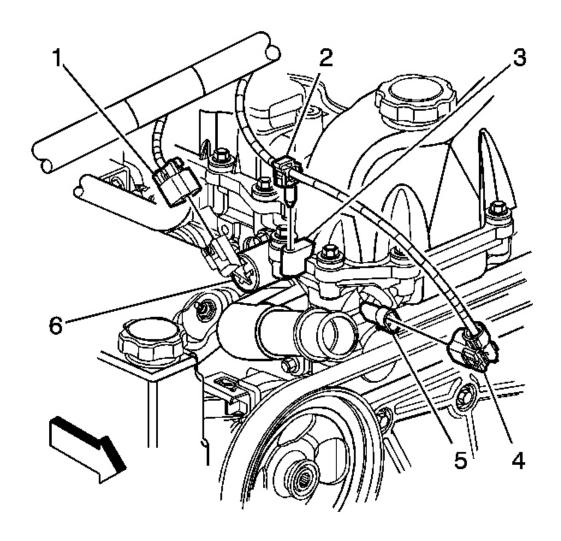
View Of CMP Sensor Connector, Exhaust Camshaft Actuator Connector & Engine Wiring Harness Retainer
